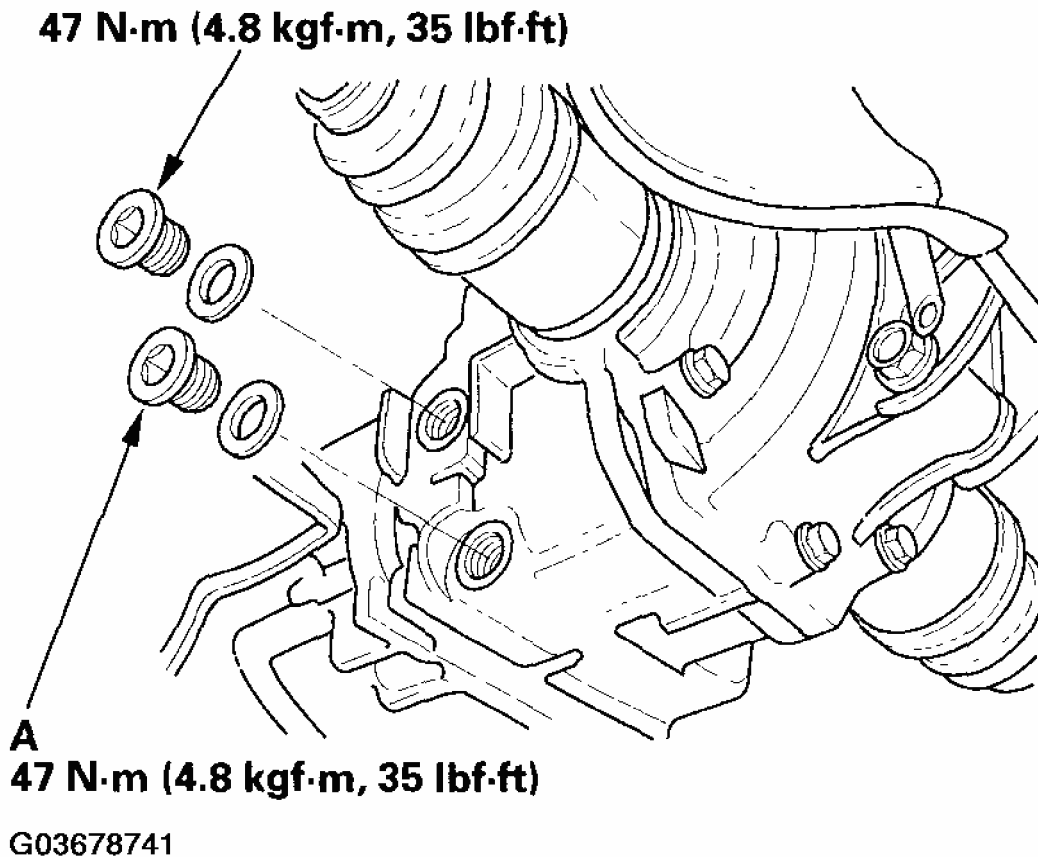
Removing Drain Plug And Drain Fluid With Specified Torques
